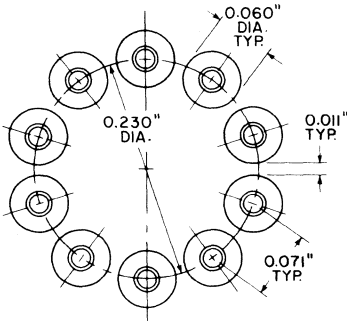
Lead-hole circle pattern for RCA 10-terminal TO-5-style package.
